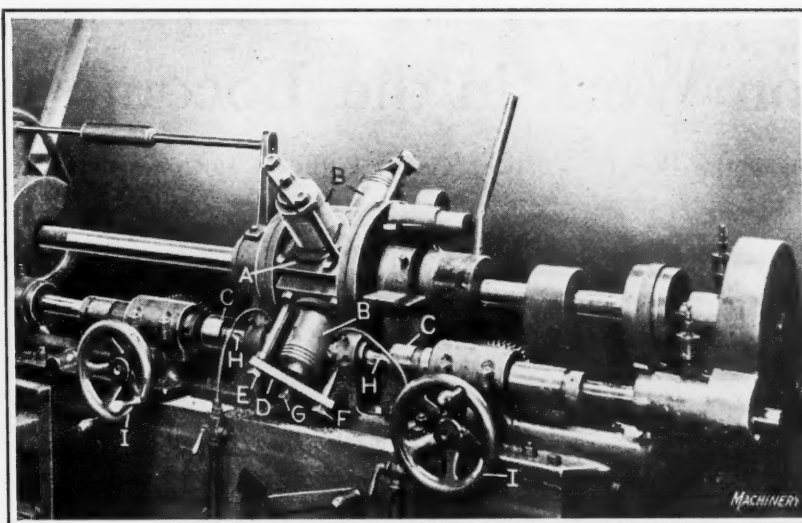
Hoefer Special Opposed-spindle Duplex Drilling Machine for simultaneously drilling the Wrist-pin Bearing Holes in Piston Castings
